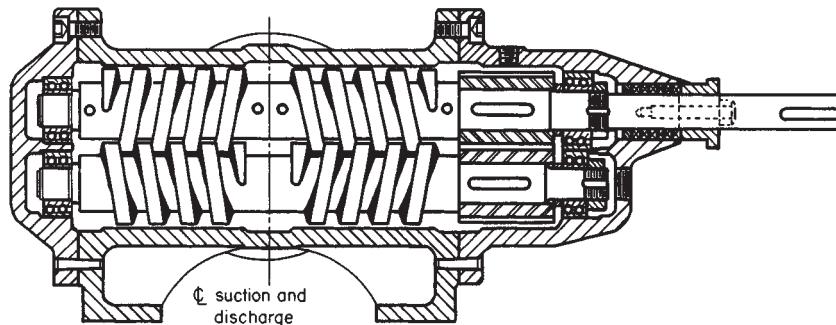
Two-rotor screw pump. (Courtesy of Warren Quimby Pump Co.)
